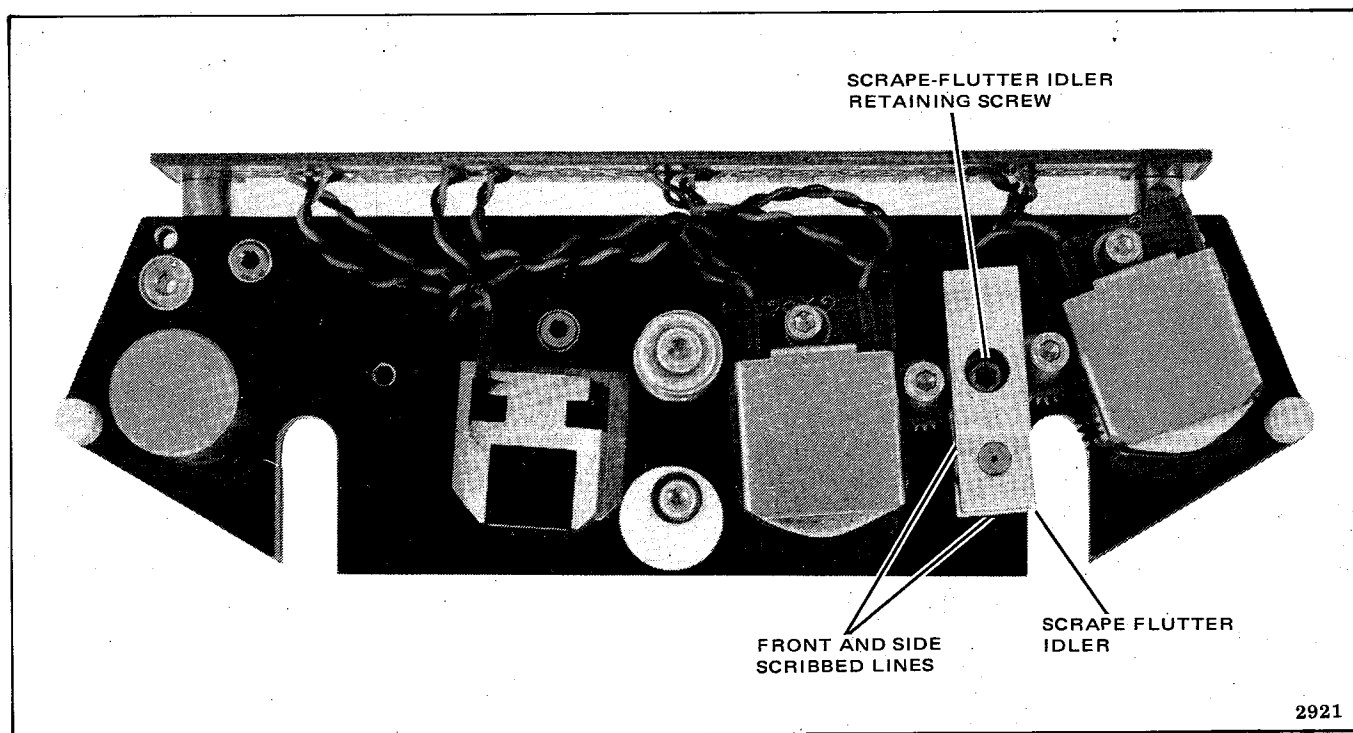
Top View of Head Assembly, Head Shield Removed
